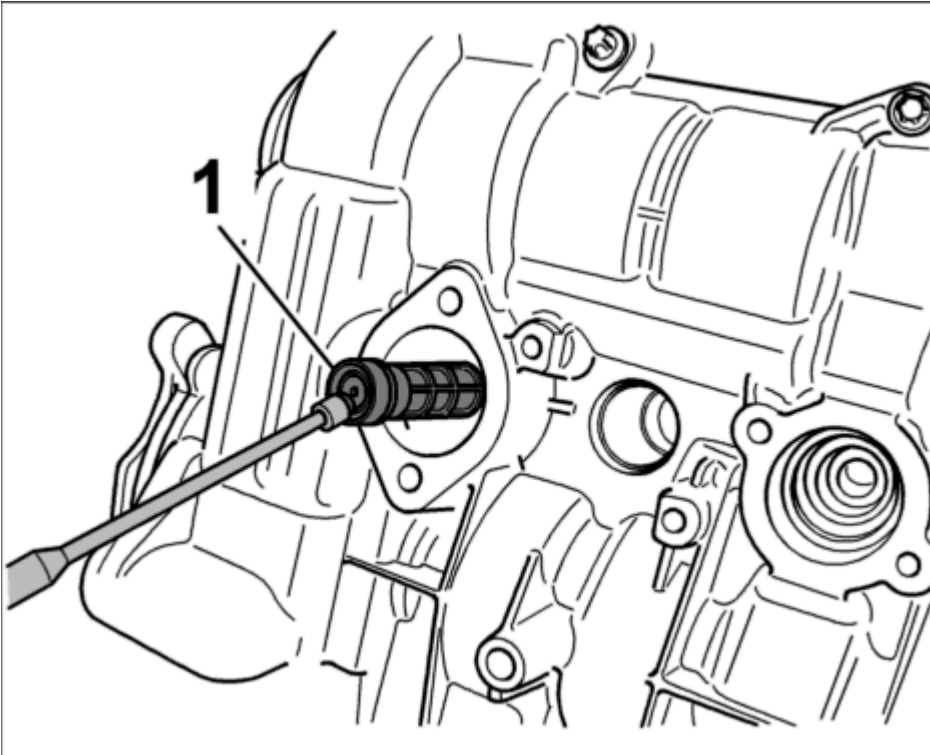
Oil strainer in hydraulic valve for camshaft adjustment
